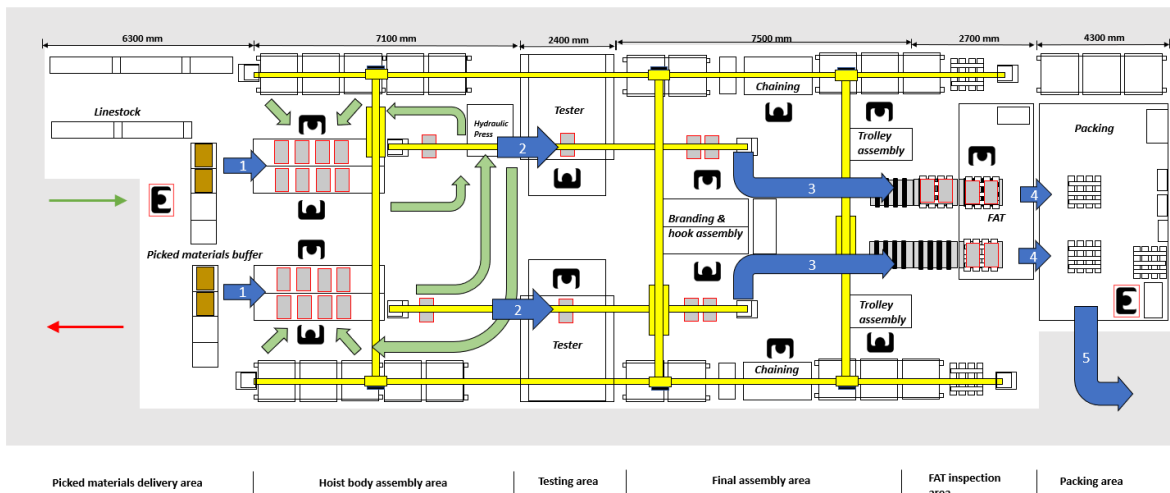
Blank paper scenario #2 assembly area layout (Factory body set)
